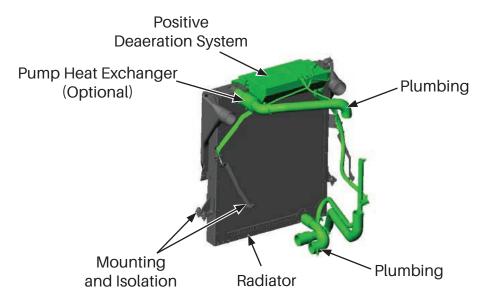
Typical Engine Cooling System - Integrated Expansion
